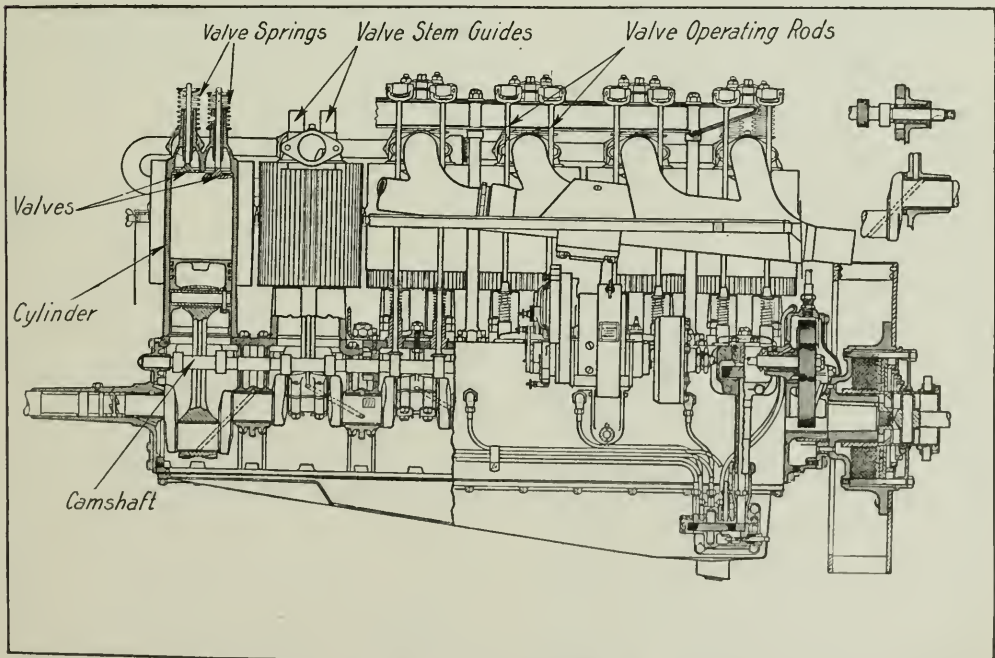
A sectional view of part of the Franklin motor, showing valve seats machined directly in cylinder head, and valve domes cast integrally with the cylinder
